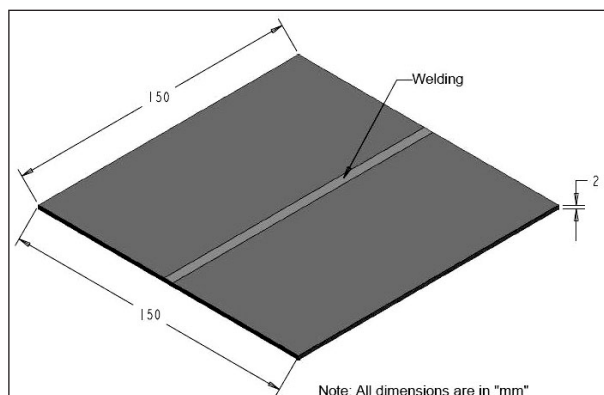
Square butt joint configuration for the fabrication of the Inconel 718 joints.
